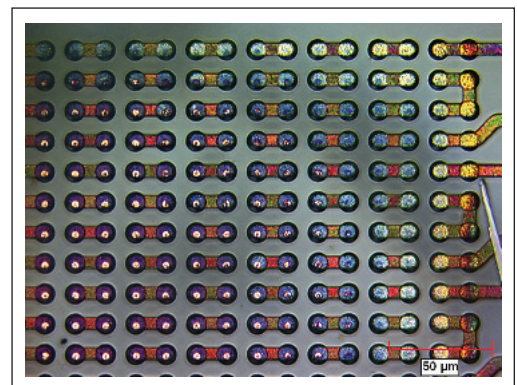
CMP Cu - CMP Cu device after shear testing, showing oxidized bond pads along the edges and corner of the Plated Cu bottom die after shear testing
